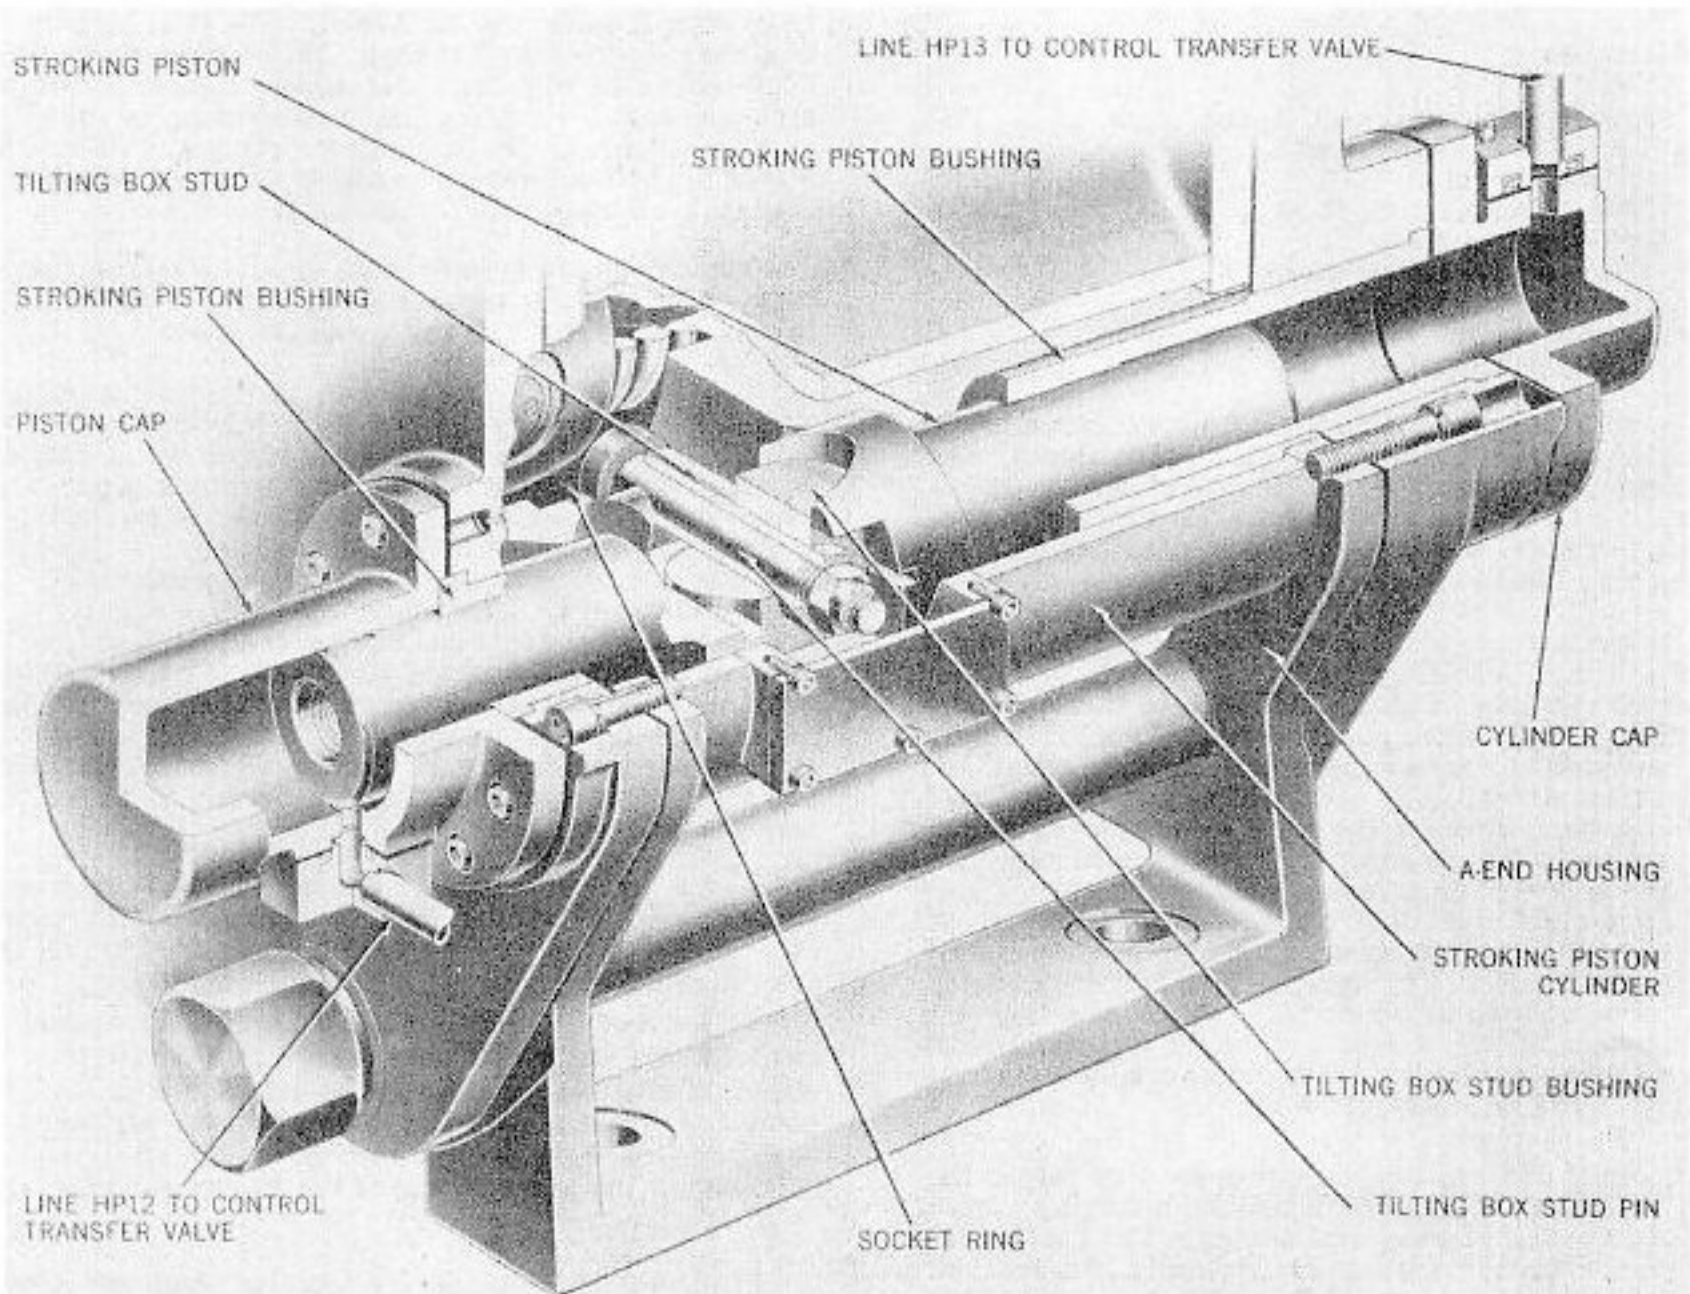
Training Gear A-end Stroking Piston, Cutaway View
